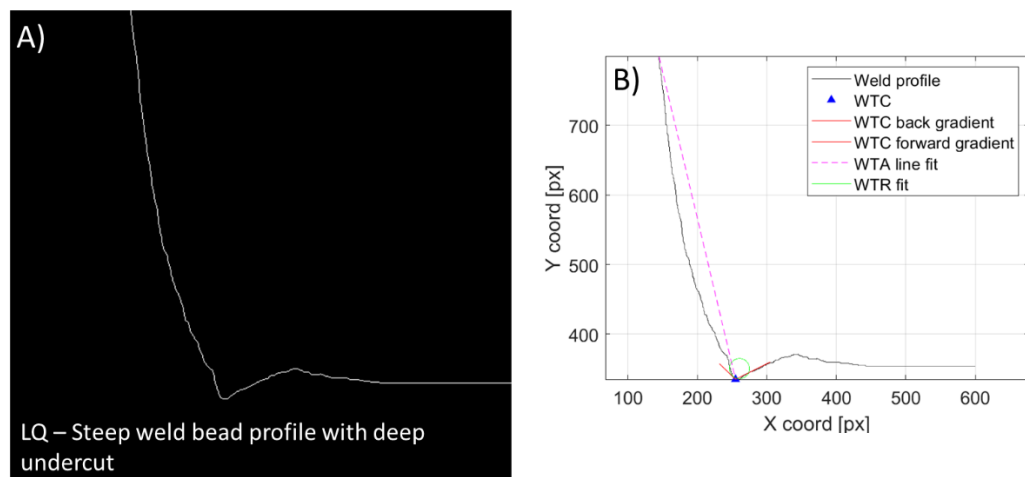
LQ steep weld bead profile with a deep undercut defect- A) original single-pixel weld bead profile; B) weld toe geometry extraction after MATLAB processing.
